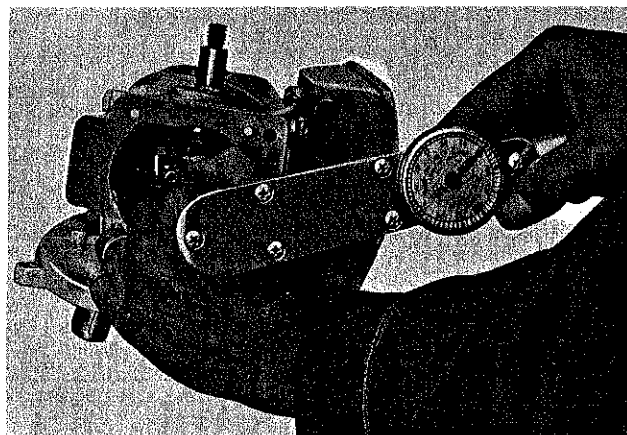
Connecting rod cap screws should be torqued up tight. Using a torque wrench, they should be tightened to a torque value of 70 to 75 inch-pounds.
